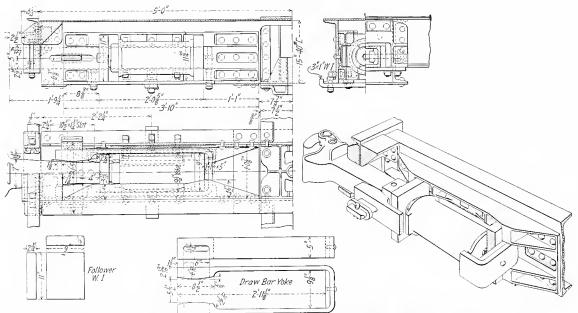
Miner Friction Draft Gear with Key Connection Between Yoke and Coupler for Freight Cars. W. II. Miner.
